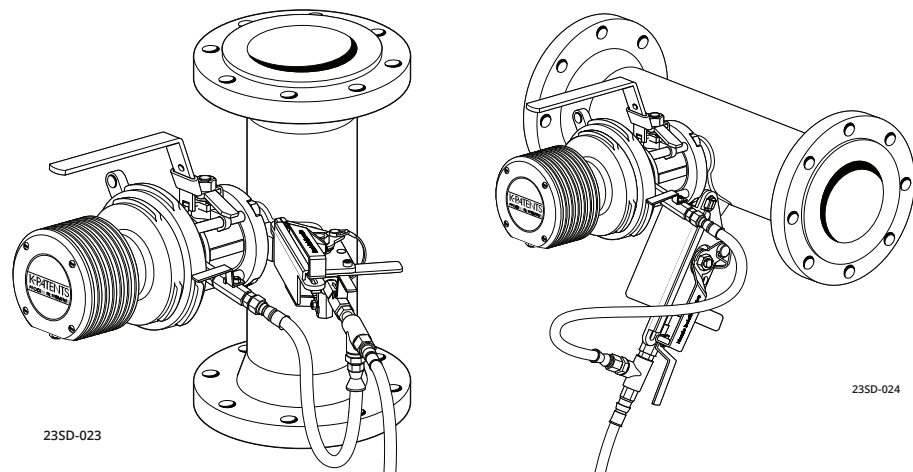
Vertical and horizontal spool piece assemblies (steam wash system)
